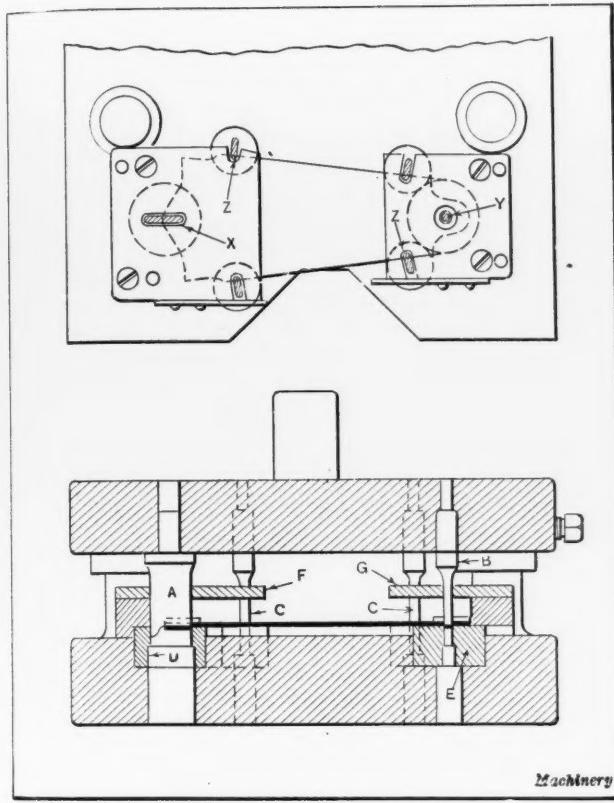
Die Equipment used for cutting Five Notches and a Hole in the Arm Blank
